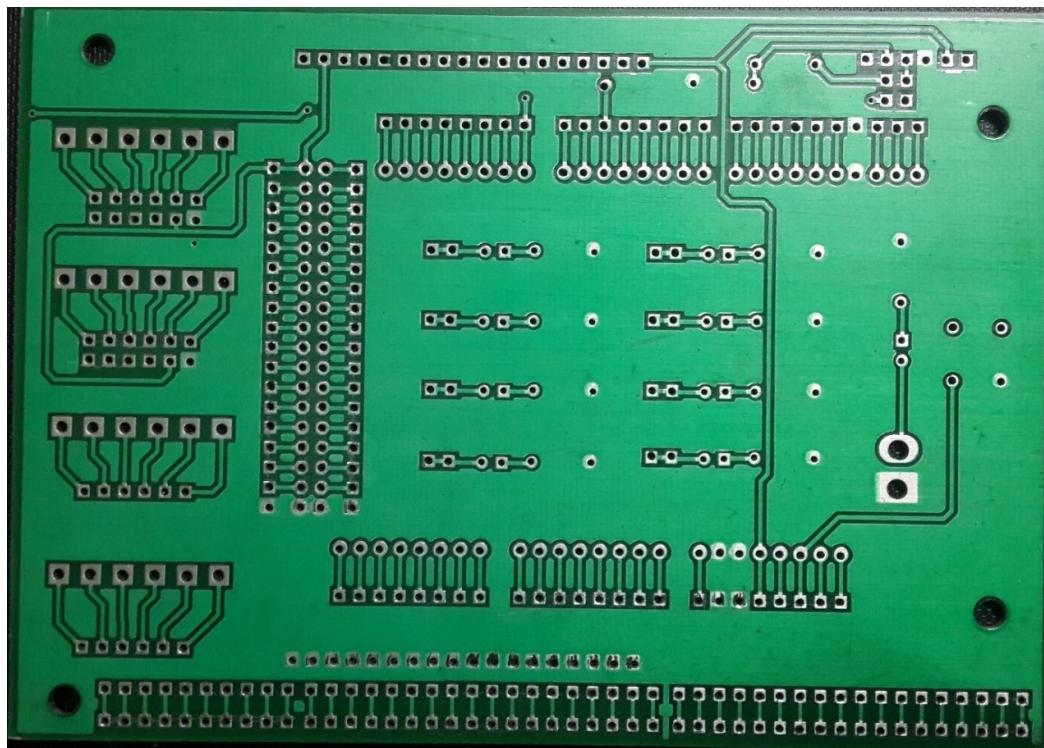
Arduino Mega PCB after fabrication - Bottom Layer
